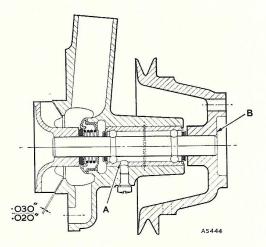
A section through the water pump showing the components. When assembled, the hole in the bearing (A) must coincide with the lubricating hole in the pump body and there must be a clearance of 020 to 030 in. (508 to 762 mm.) between the vane and the pump body. The recessed face of the hub (B) must be flush with the end of the spindle.
